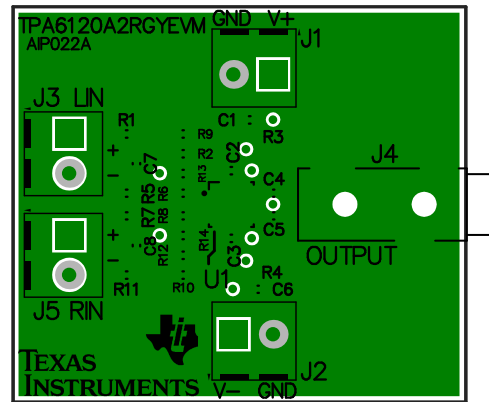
Example PCB Layout, Bottom Layer and Silkscreen, Top View
